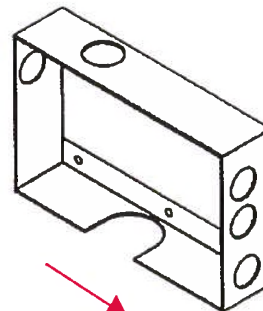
Model MB-P2 – Control Head Mounting Bracket.
